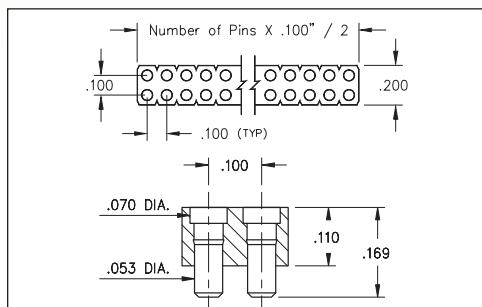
and Fig. 2 Coplanarity .005". For pin counts >20 positions, consult Technical Support.
